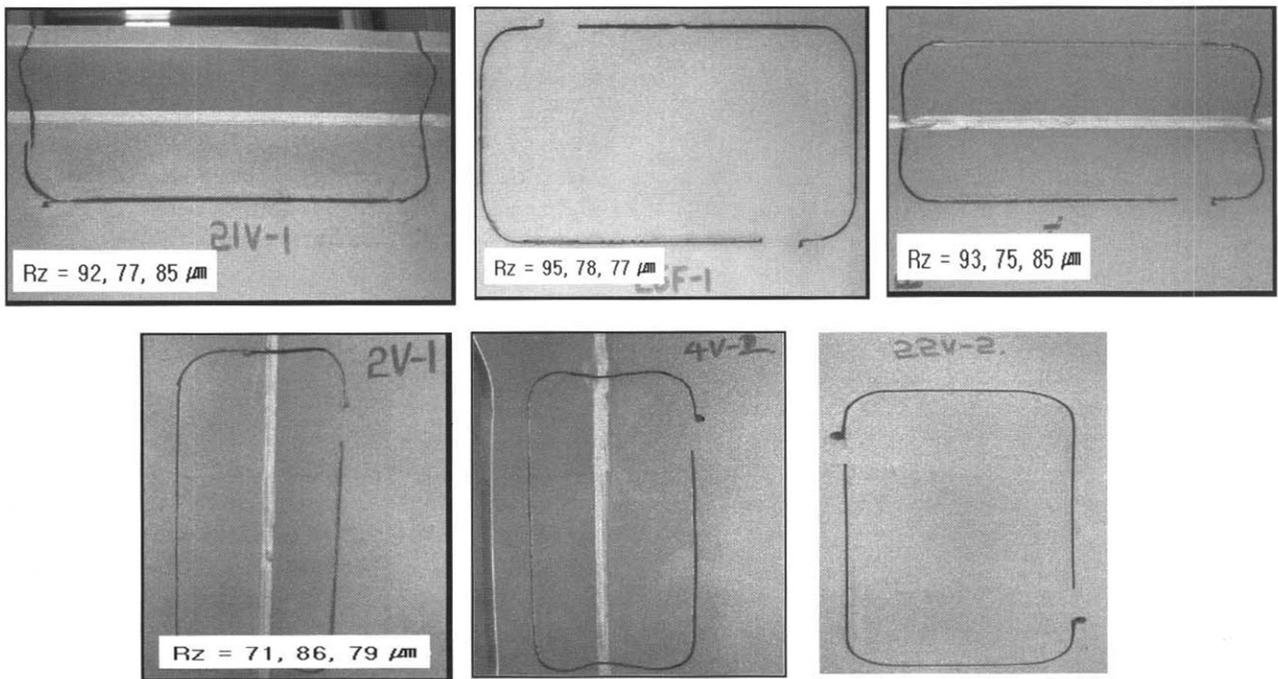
Typical surface condition of the PCP coated blocks right after full blasting
